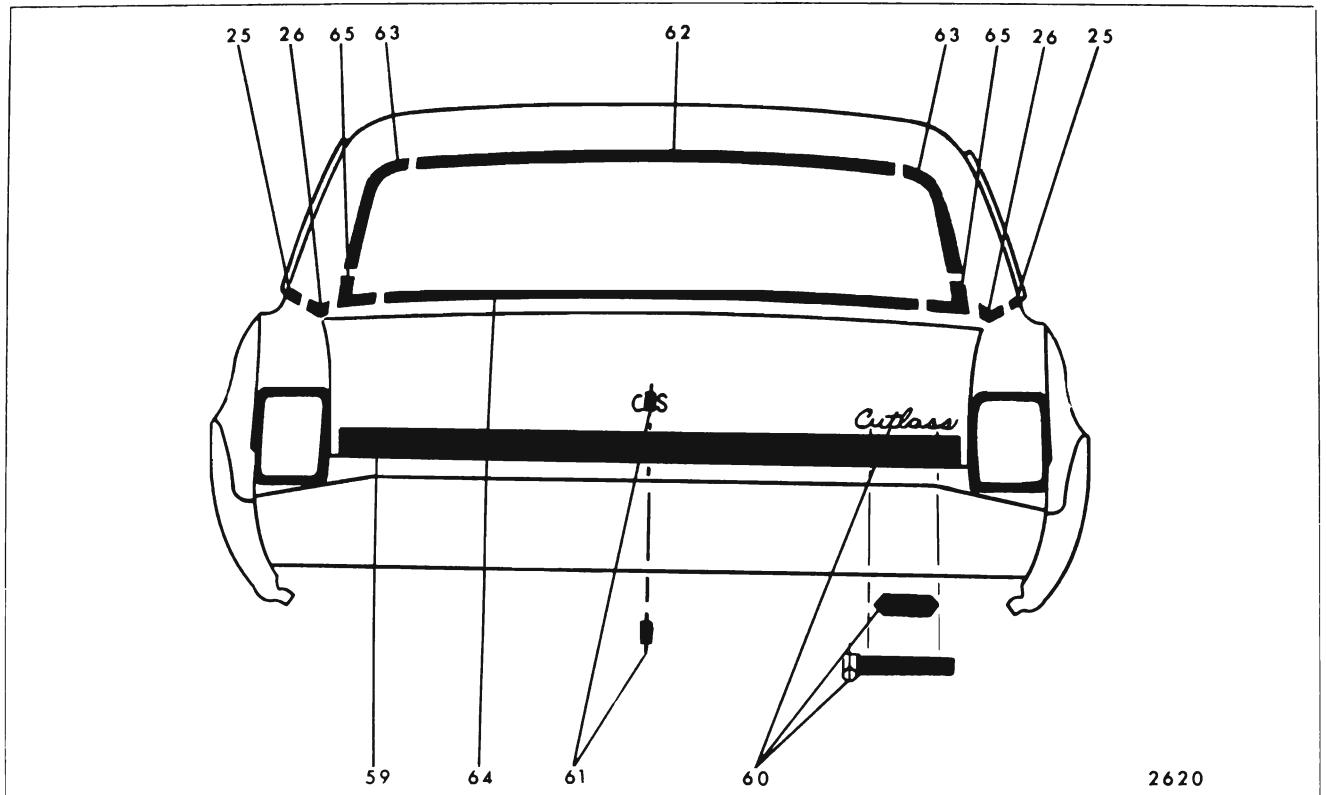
Oldsmobile 33400-33600-33800 (Except 35-55-65 Styles)
